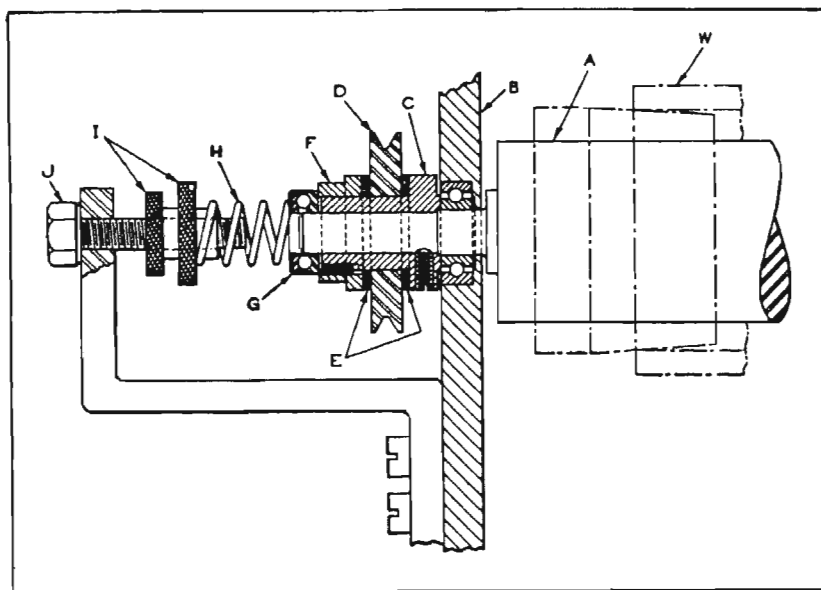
Rewinding Roll Equipped with Friction Driving Mechanism.
